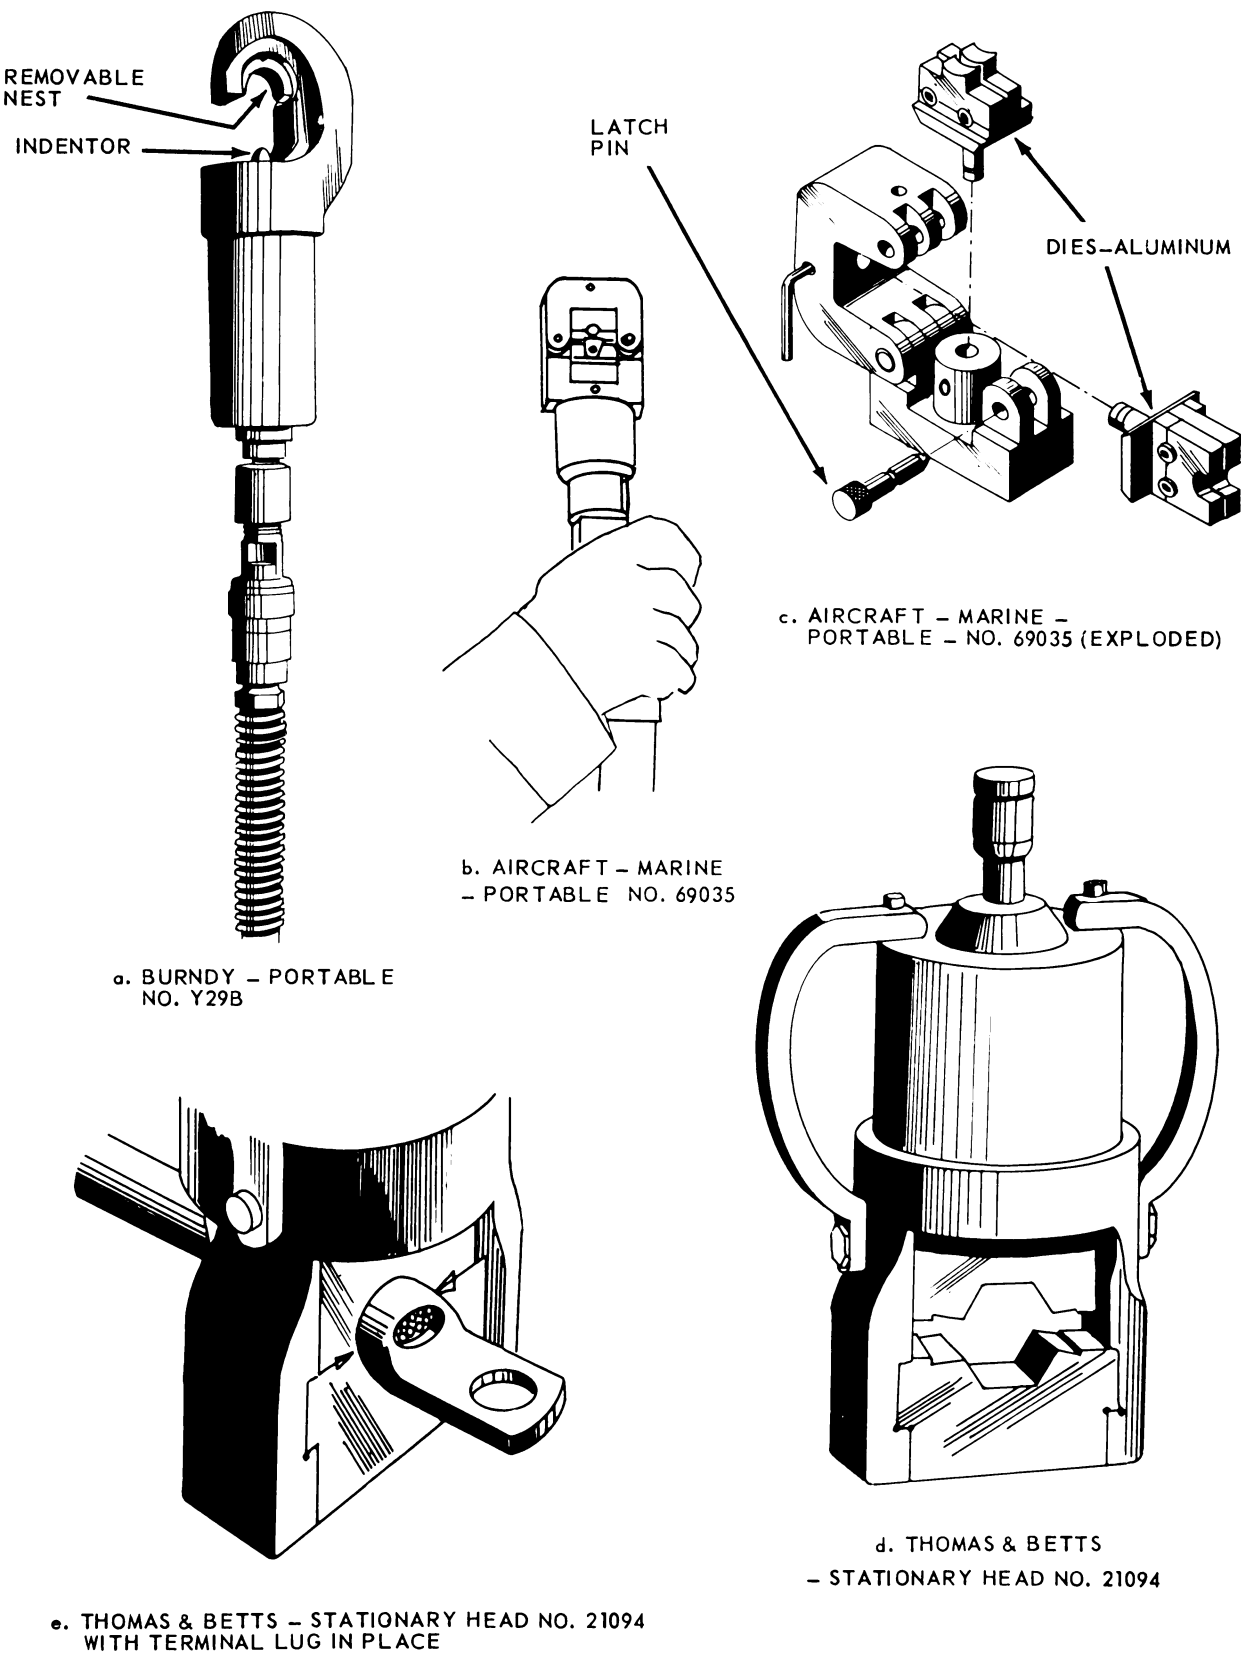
Tools - Power Crimping - Aluminum Terminal Lugs
